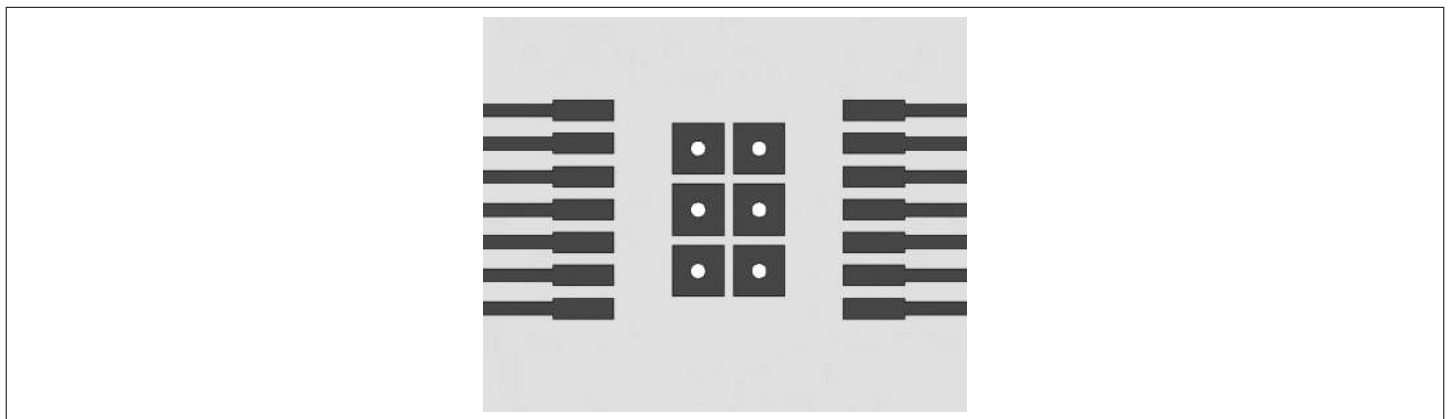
Thermal vias on PCB for 2s2p PCB setup
